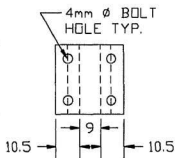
Part No. 17	Drawn BY: David Greening	Designed BY: David Greening
